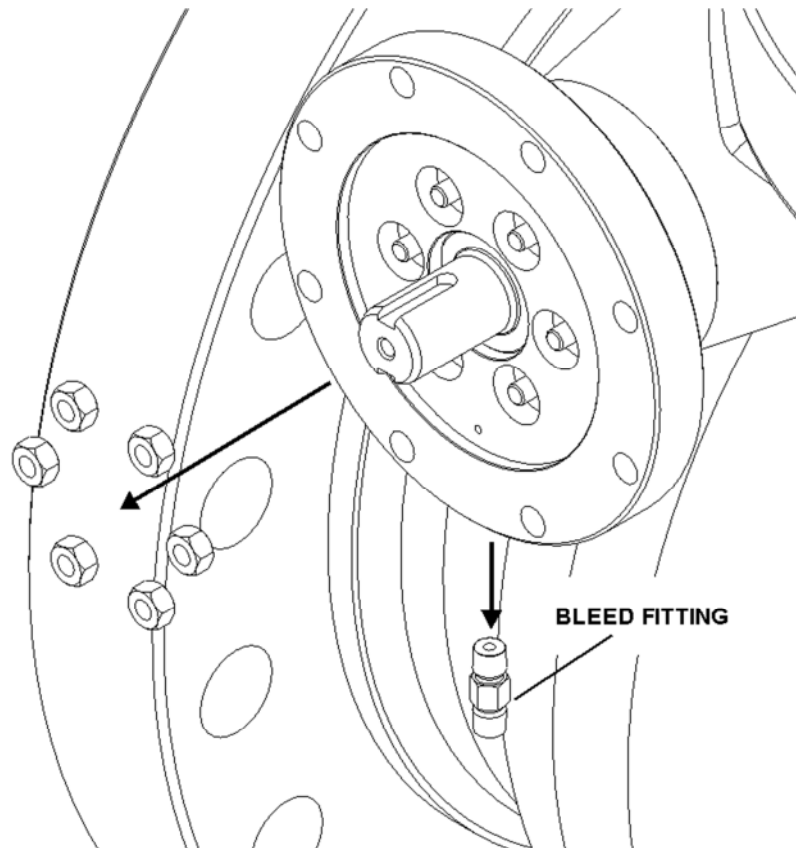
Removal of heavy hex nuts and bleed fitting shown.
